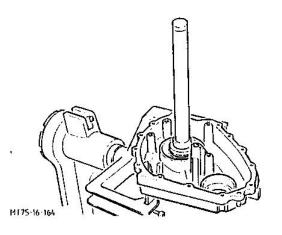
Fit transmission mainshaft transfer box radial oil seal using Special Tool 16-054.
